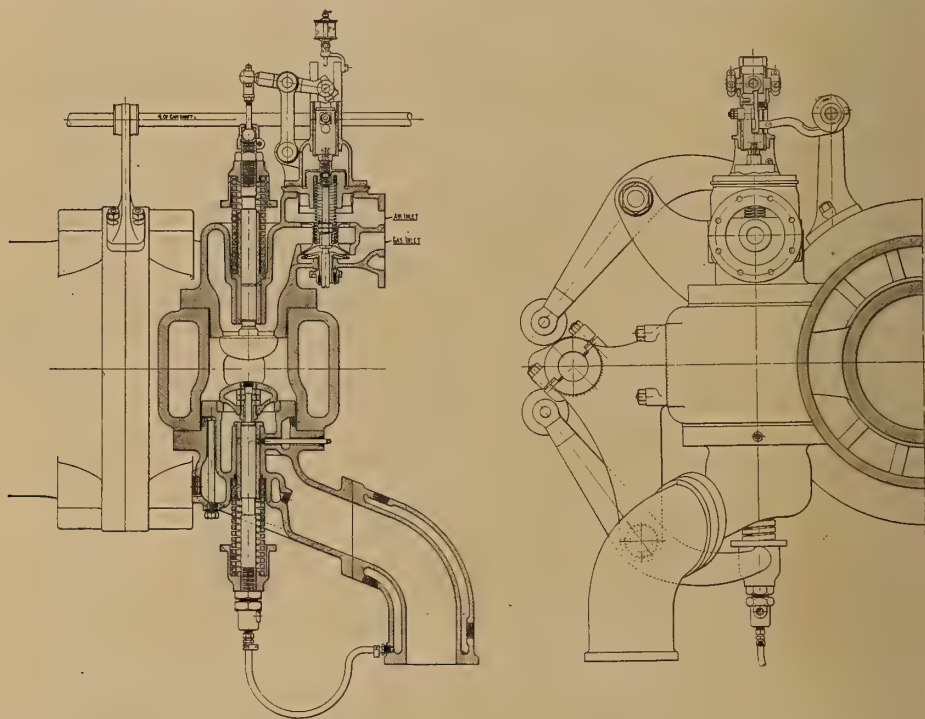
GENERAL ARRANGEMENT OF VALVE GEAR OF THE SNOW STEAM PUMP COMPANY'S ENGINE. THE SNOW STEAM PUMP WORKS, BUFFALO, N. Y.
